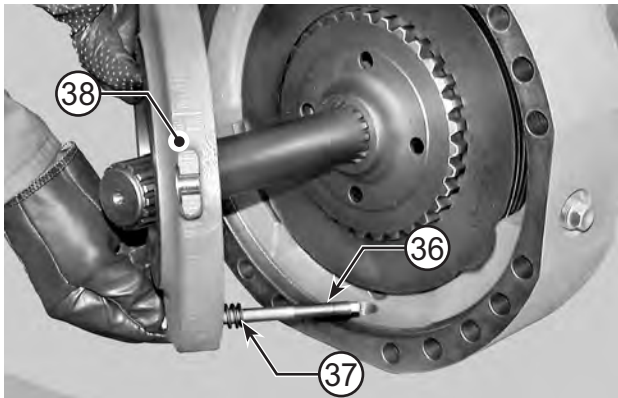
Remove screws (36), springs (37), and pressure plate (38).
